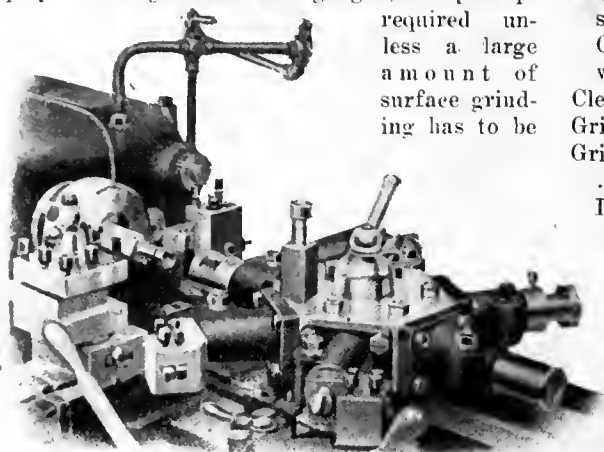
TYPICAL OUTFIT OF CAPSTAN LATHE TOOLS.
